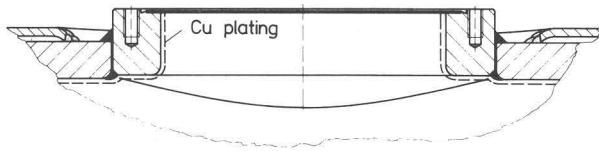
Con Flat flange welded into the cavity wall. The copper deposit smoothly covers the flange surface and the knife-edge area on the outside.
